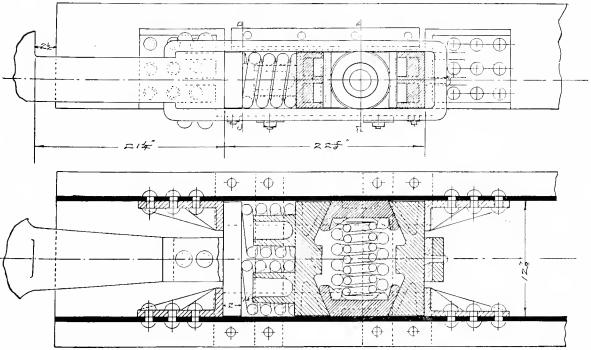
Butler Friction Draft Gear No. 370 Applied to Freight Car. Butler Drawbar Attachment Company.
